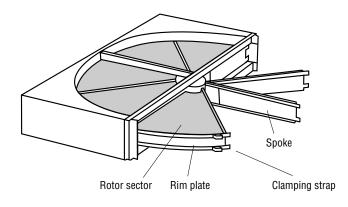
5. On horizontal installation, the sequence of assembly shown in Fig. 10:1 is not applicable. Fit each rotor sector complete with the sector components and clamping straps before fitting the next sector. Remove the rotor assembly locking device (see Fig. 9:1), and fit one rotor sector next to the assembled rotor half. Fit the rim plate and clamping straps for the rotor sector. Ensure that the rim plate and spoke flange fit over the edge of the rotor sector. The chamfered corners of the clamping straps must face outwards. Tighten the clamping straps are on the inside of the outer edge of the rim plate.
